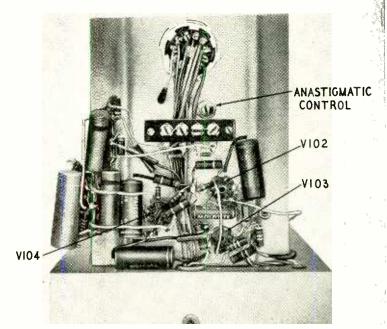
The 5BP1 mounting bracket is flattened out and used as a chassis.
